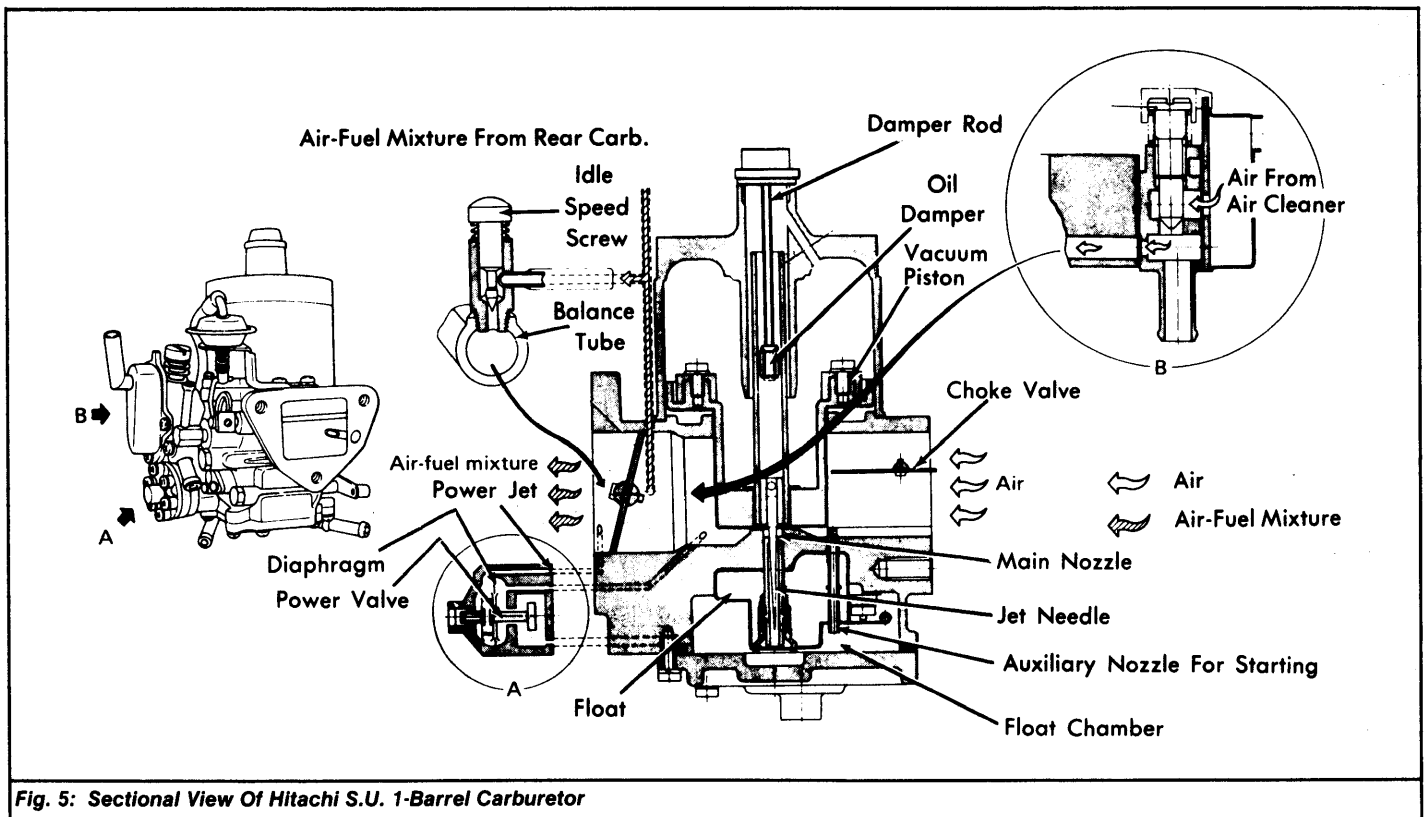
Sectional View Of Hitachi S.U. 1-Barrel Carburetor
